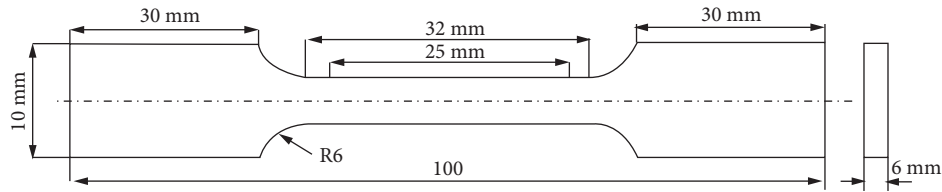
Dimensions of the tensile specimen (ASTM E8M-04).
